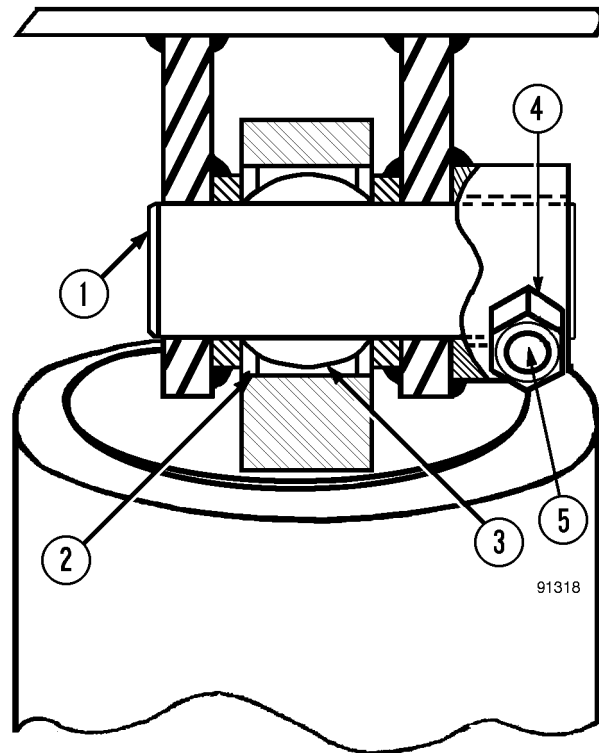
HOIST CYLINDER UPPER MOUNT
